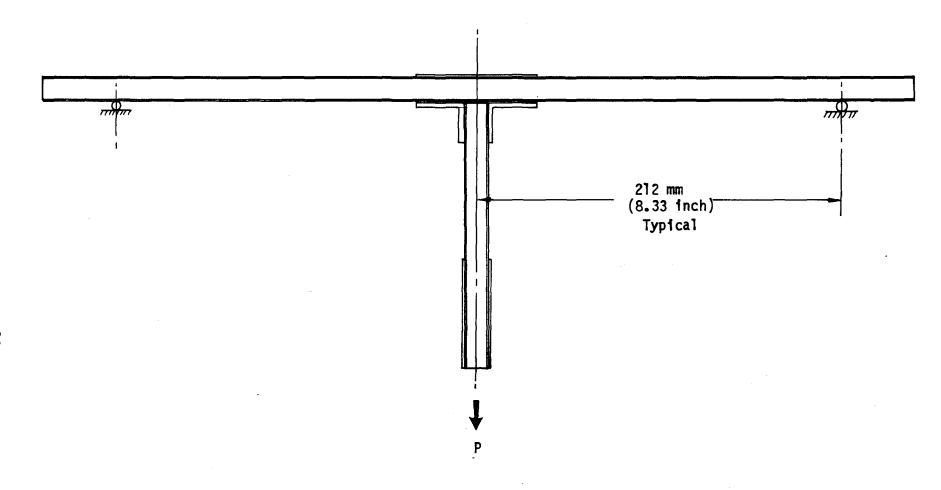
Typical Test Setup For Type 4 Bonded and Bolted Joints
